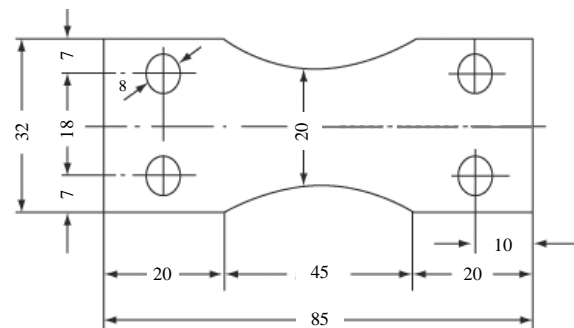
Fatigue sample dimensions in millimeters. Thickness: 1.5 mm.
